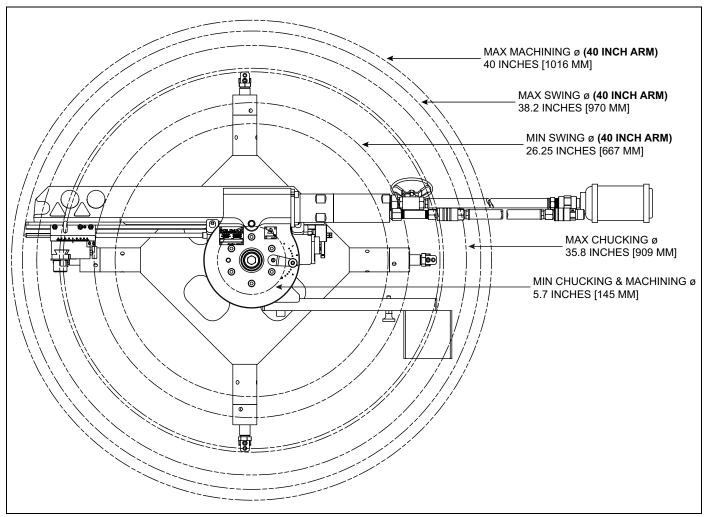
DIMENSIONS FOR 40" (1,016 MM) MACHINING ARM
